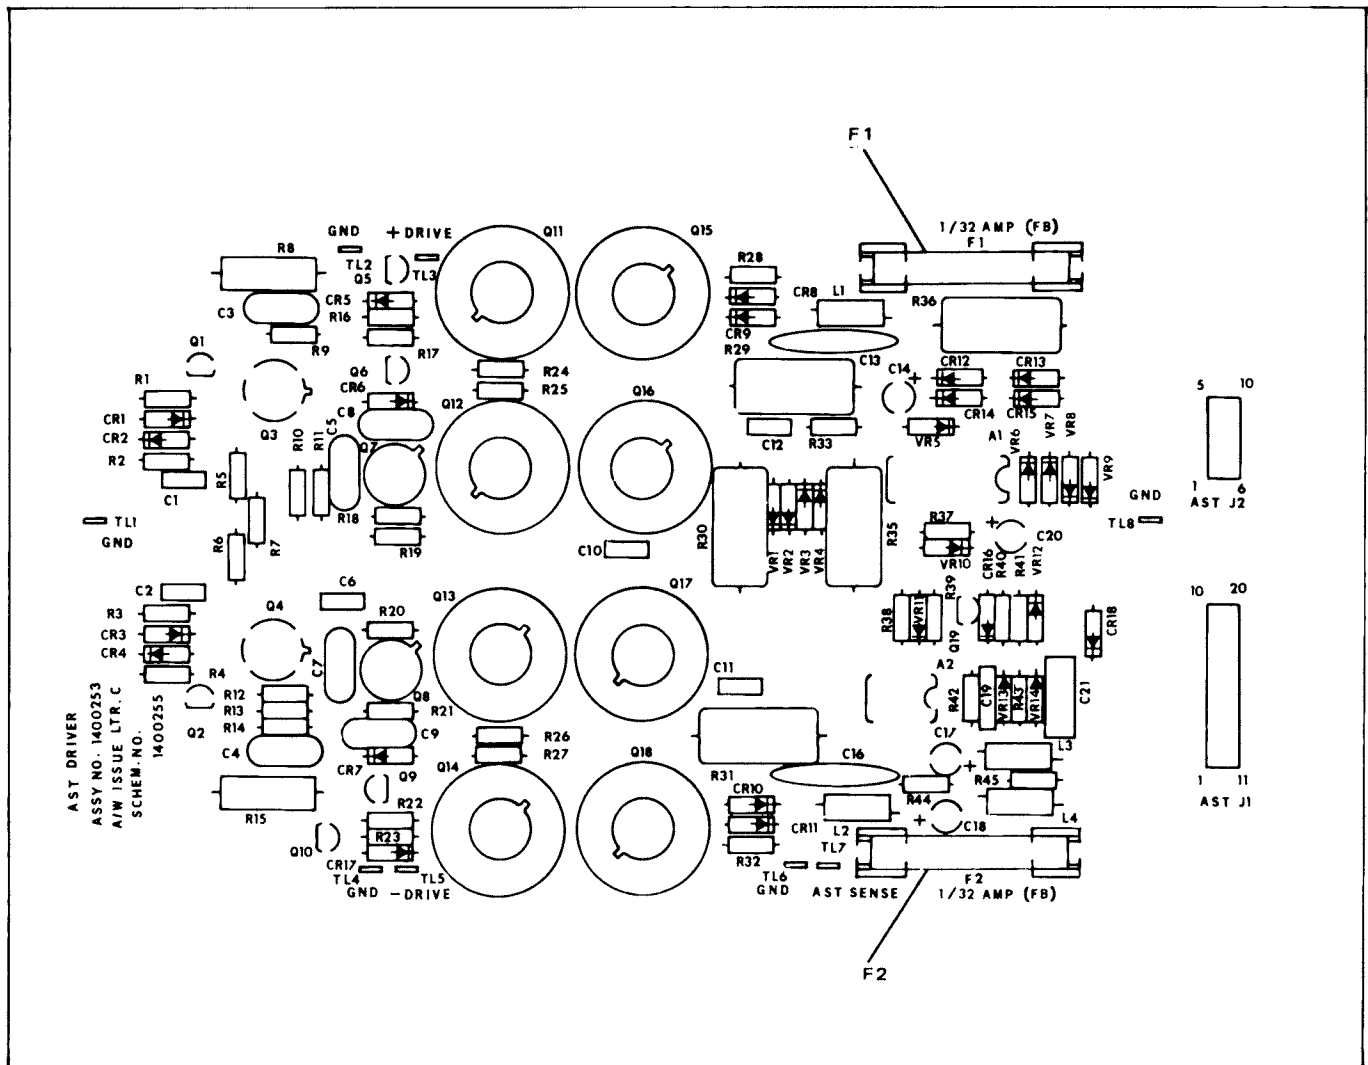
AST Driver PWA, Assembly No. 1400253
